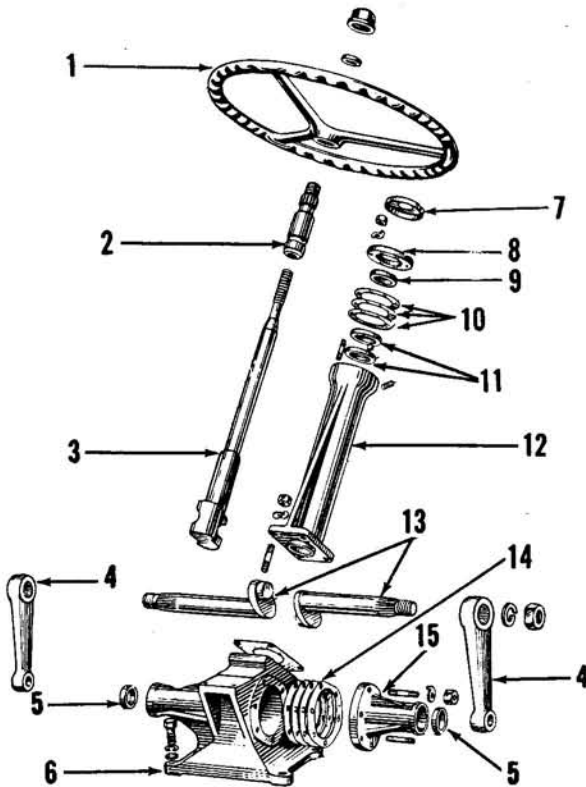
Exploded view of worm and nut type steering gear. Rotary movement of the main nut (2) moves the worm shaft (3) vertically, rotating the two rocker shafts (13) in opposite directions.
